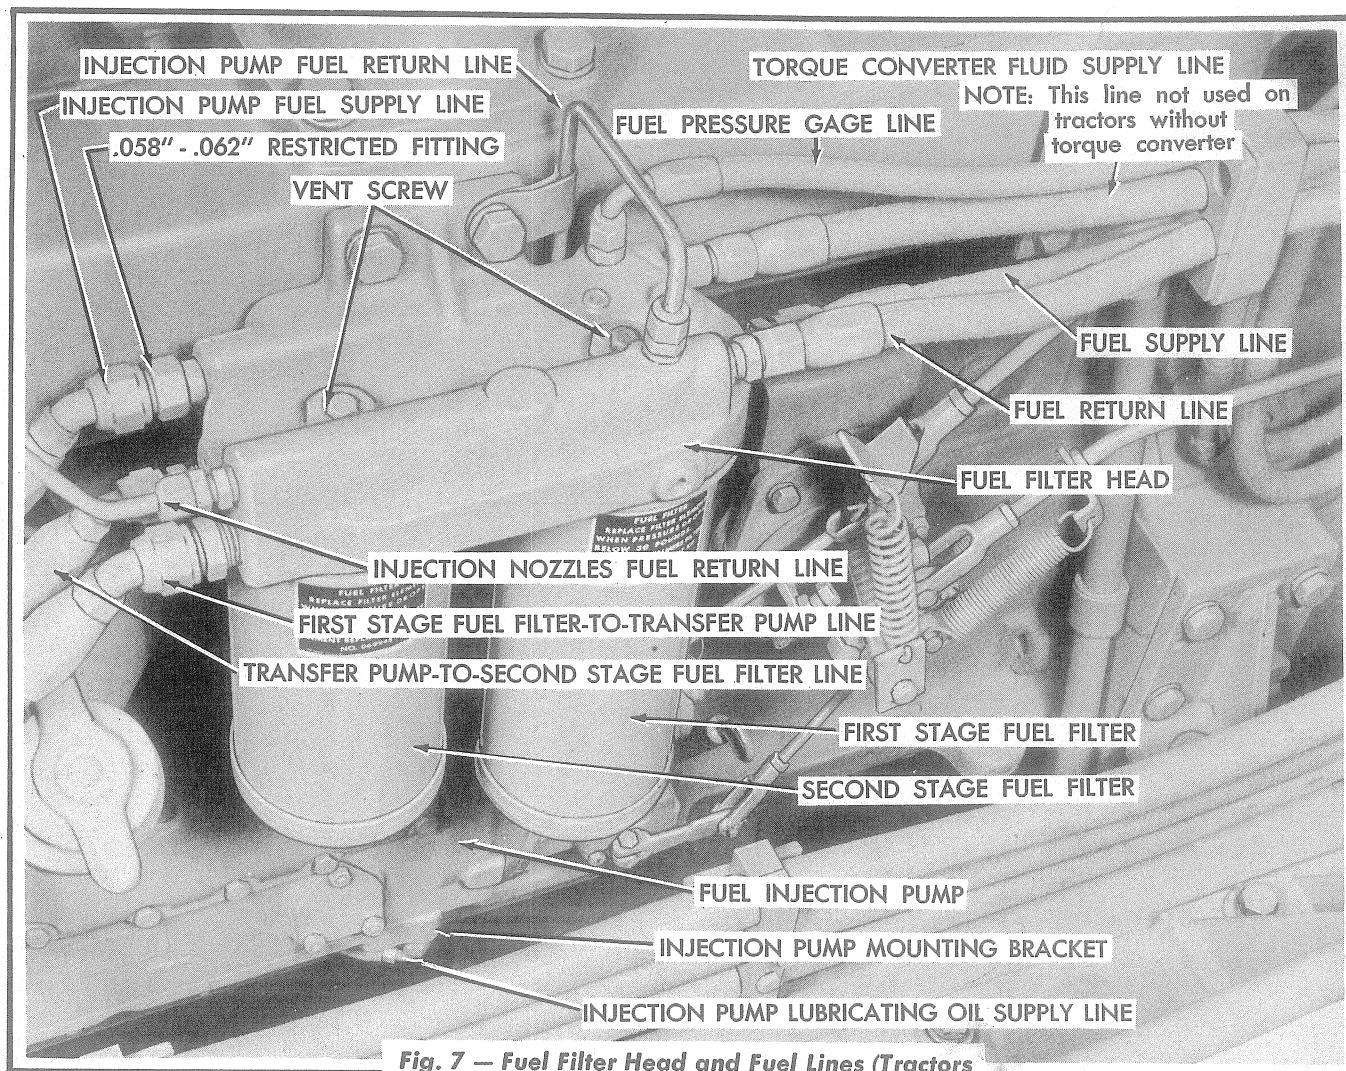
Fuel Filter Head and Fuel Lines (Tractors Serial No. 4001 and Above With Torque Converter Shown — Tractors Without Torque Converter Similar)
